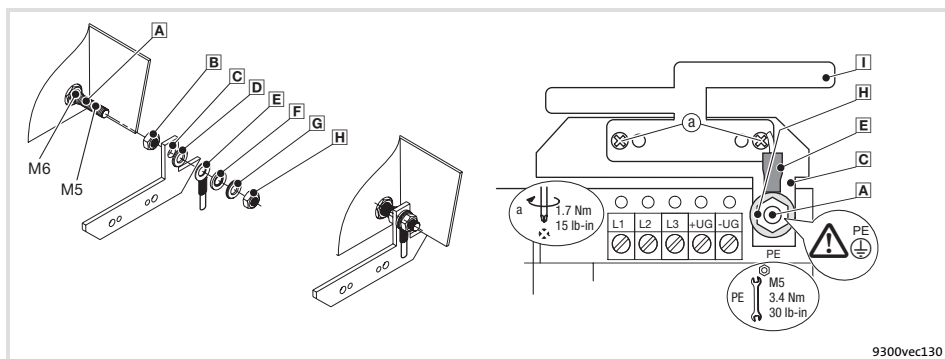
Installation of shield sheet for drive controllers 0.37 ... 11 kW
